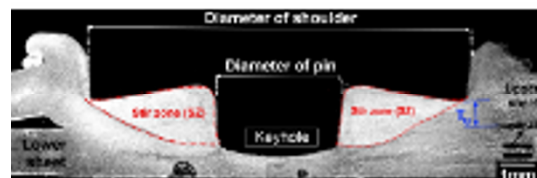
Cross-sectional macrostructure of a typical friction stir spot weld illustrating the different weld geometrical features.
